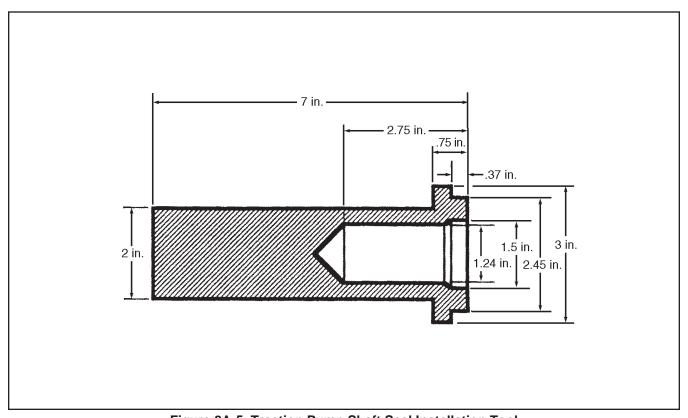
A-5. Traction Pump Shaft Seal Installation Tool
